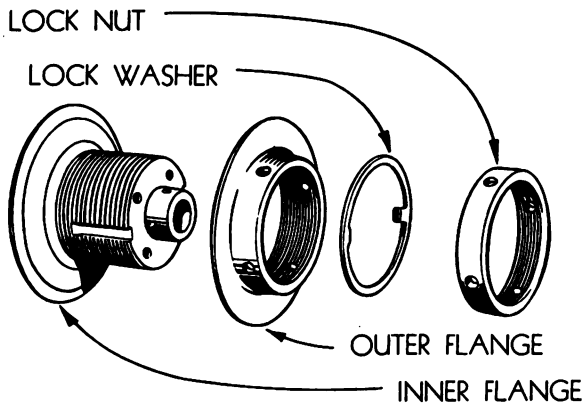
Component Parts of New Heavy Duty Water Pump Pulley
